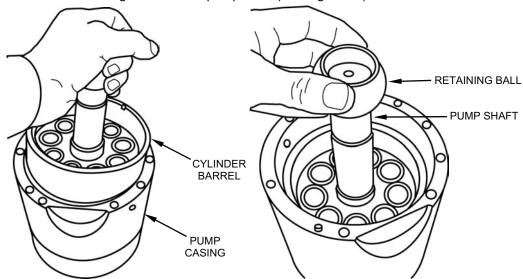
Installing the Cylinder Barrel and Retaining Ball.
